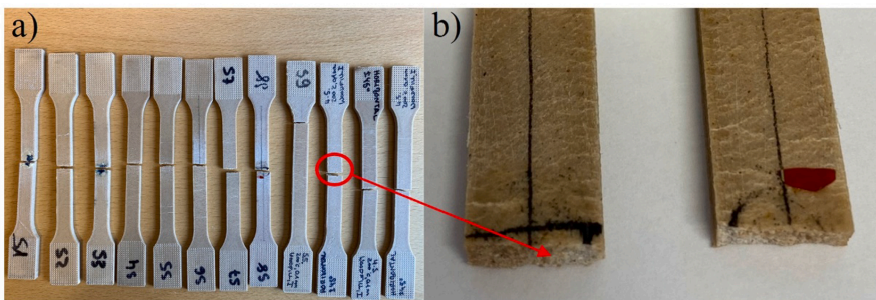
(a) Biocomposite dogbone specimens after tensile testing and (b) fracture surface showing brittle fracture.
